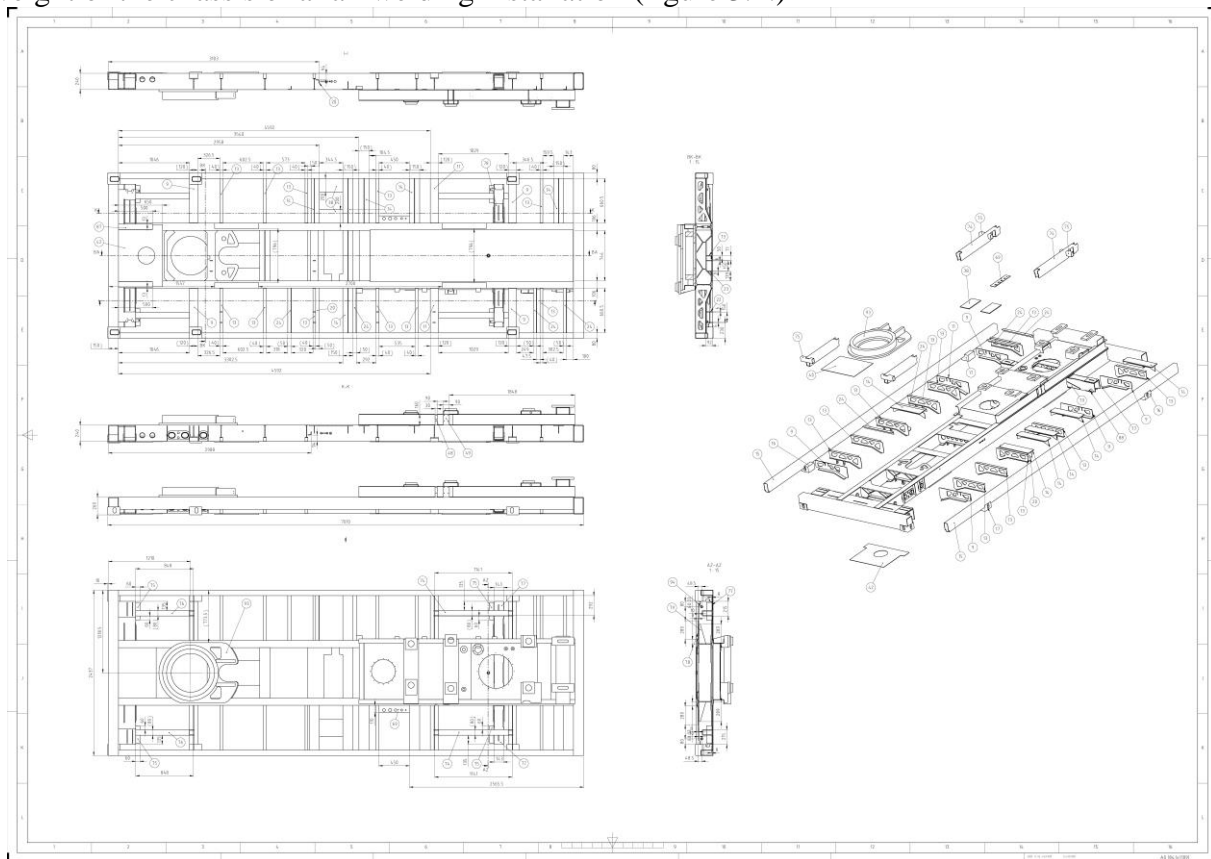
Execution drawing of the chassis for the rail welding installation (FBW machine)
